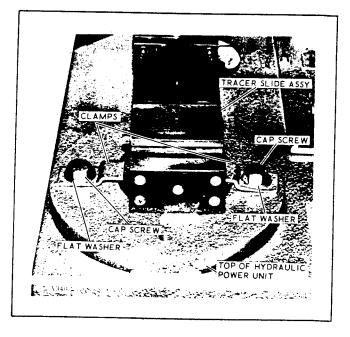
Mark "O-A" Series Tracer Slide Assembly Installed on Hydraulic Power Unit for Storage
